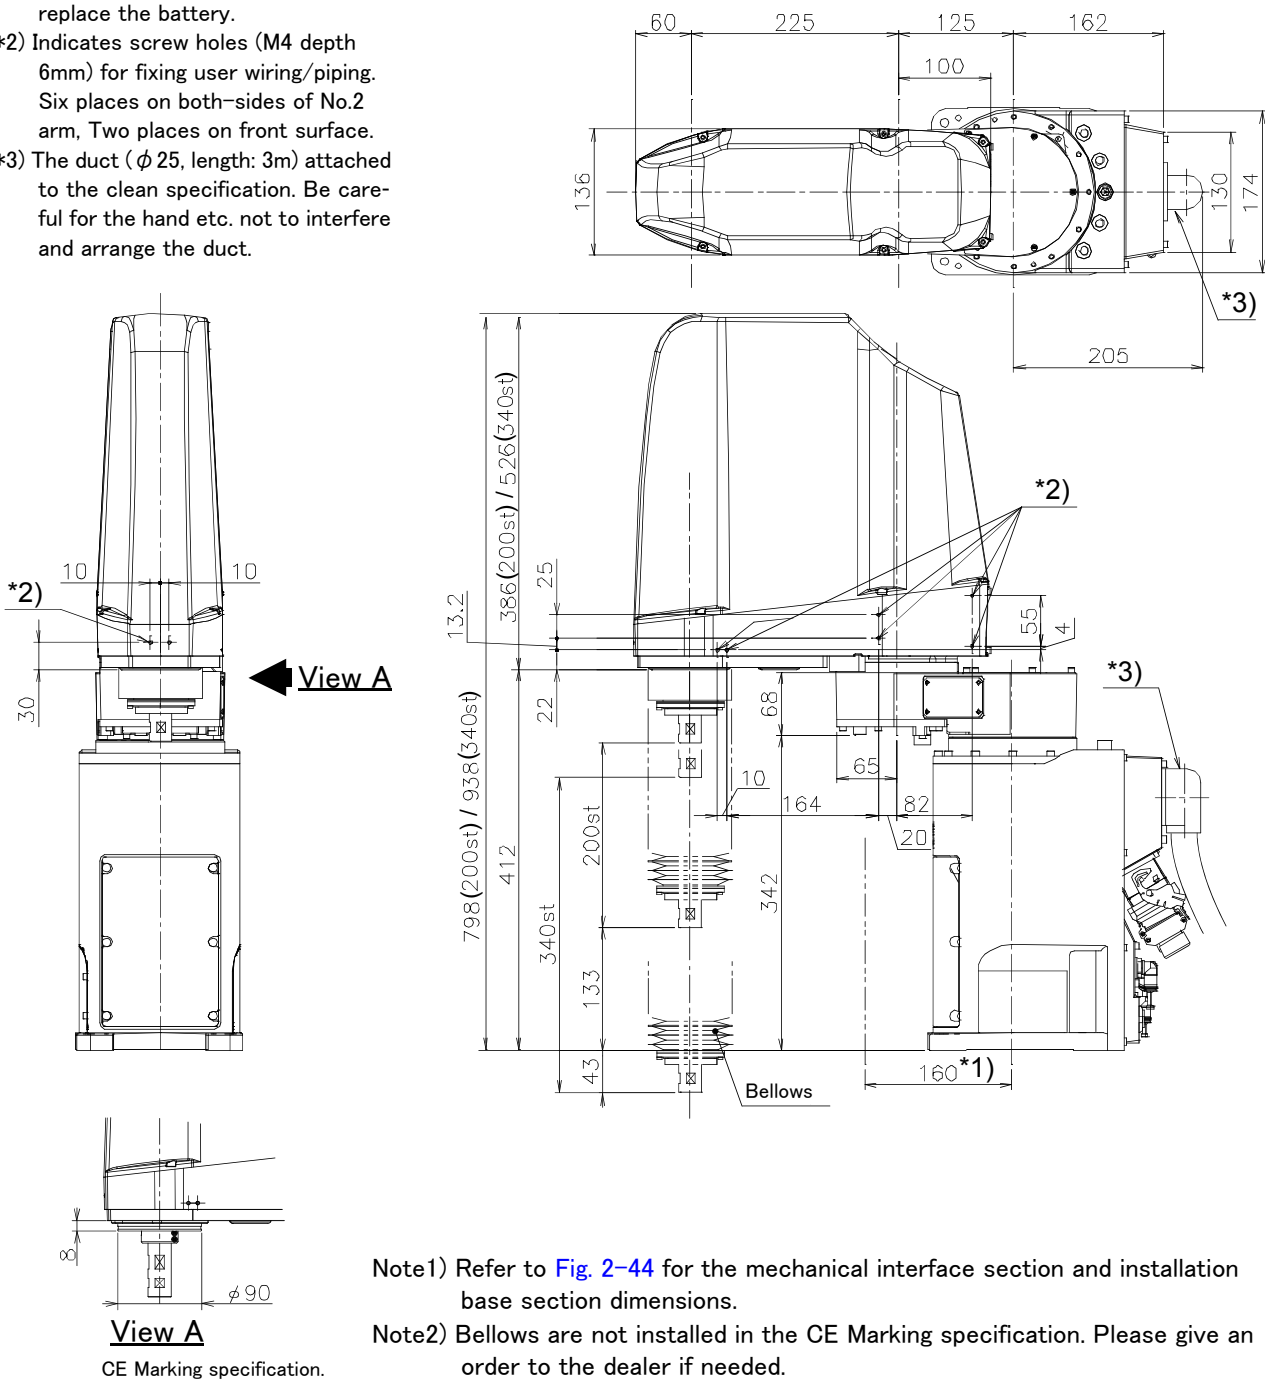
Outside dimensions of RH-6FH35xxC/M
